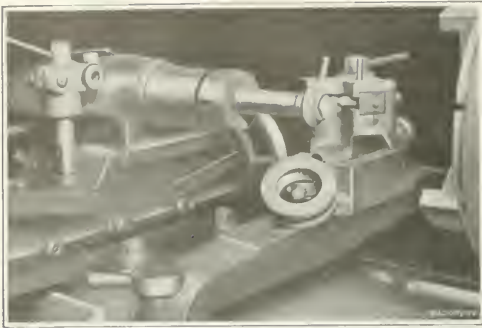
Double Angle Wheel Truing Device shown set up and in Operation on Head Internal Grinding Machine
